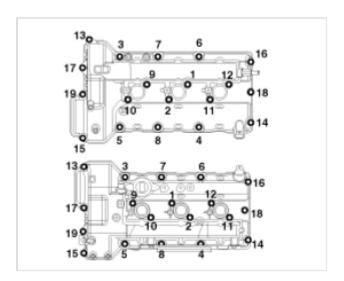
Identifying Cylinder Head Cover Bolts Tightening Sequence
